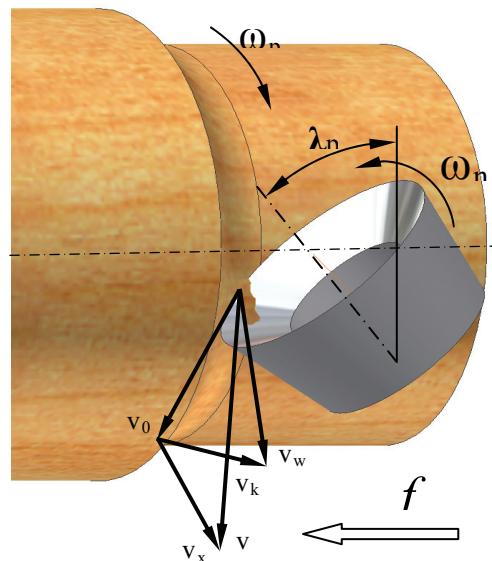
Kinematic dependences during machining with self-propelling disc tool.
